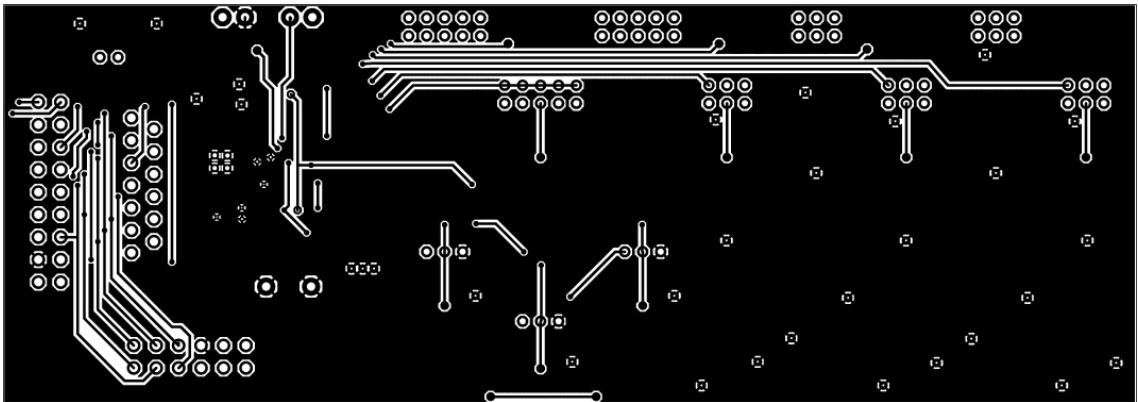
Atmel ATA664151 Board; Bottom Side, Top View (as if PCB is Transparent)
